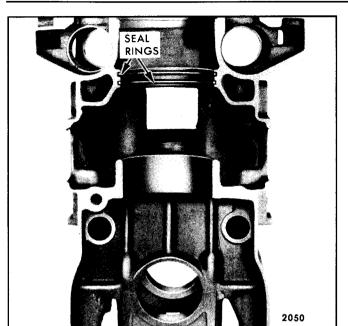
Cylinder Liner Seal Ring Location in Cylinder Block Bore
